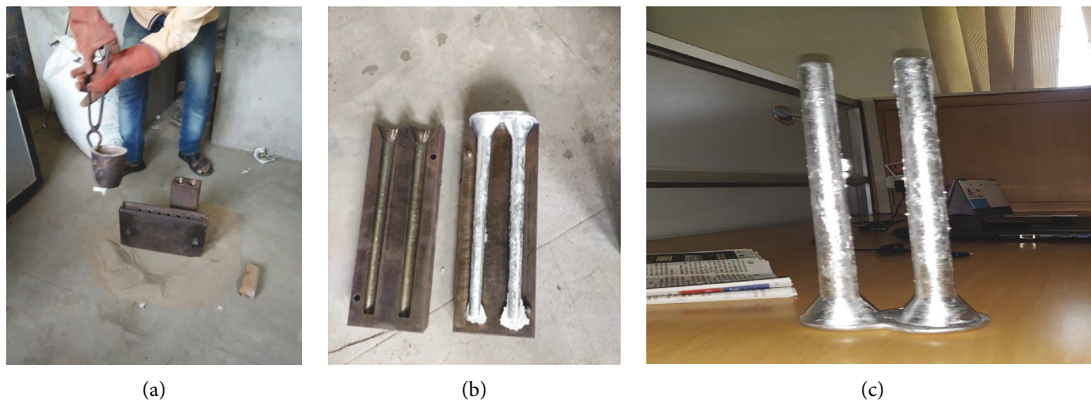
(a) Molten melt poured in die. (b) Molten melt cooled in die. (c) Removal of specimen from die.
